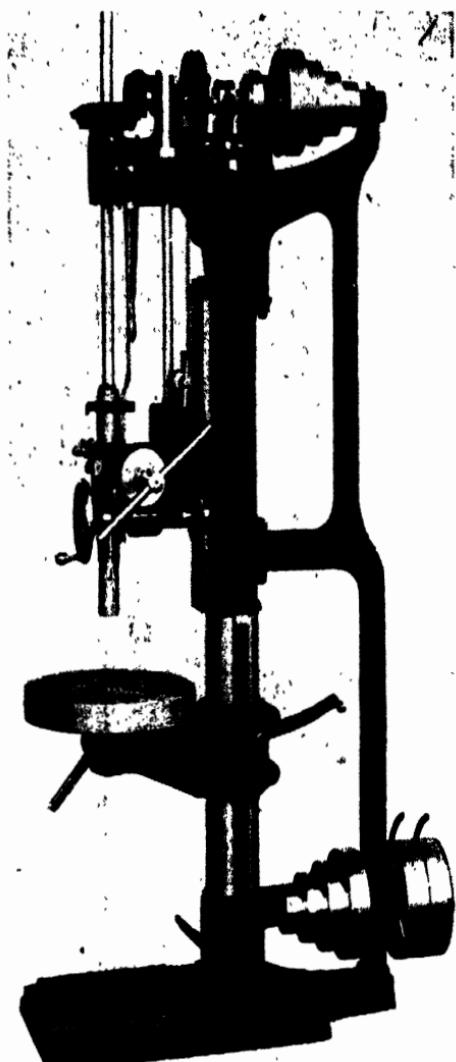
Partially guarded vertical drilling machine. (*Courtesy of The Cincinnati Bickford Tool Company.*)
